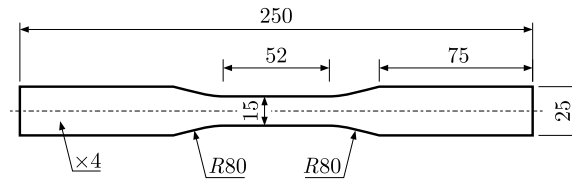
Engineering drawing of coated MAR-M247 specimen for mechanical testing.
